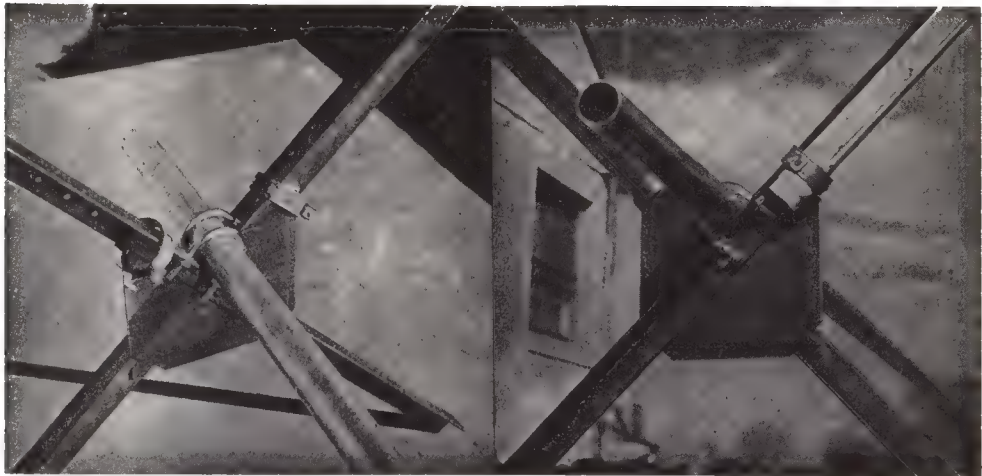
Inside (left) and outside (right) views of a spreader support for quad antennas (W3PRU). The assembly is clamped to a tubular boom with U bolts. The spreaders (bamboo shown here) are clamped inside angle-stock crossbars with adjustable hose clamps, both near the center of the assembly, as shown, and at the outer ends of the angle pieces.
